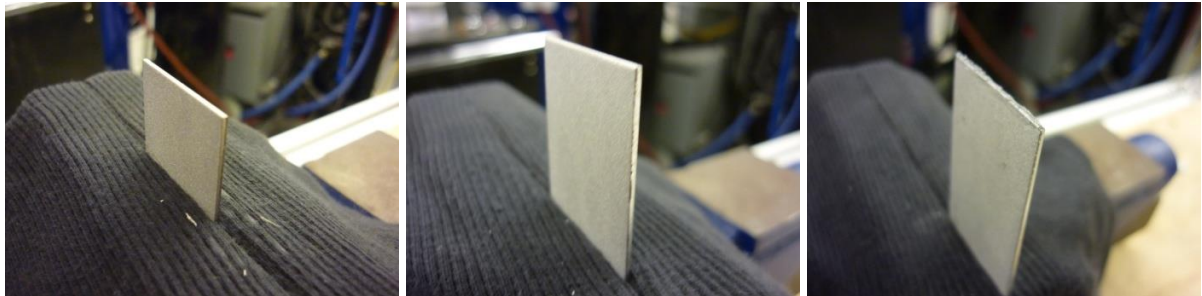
Aluminum 7075 strip rupture samples prior to bending (coating on aluminum IVD coating).
